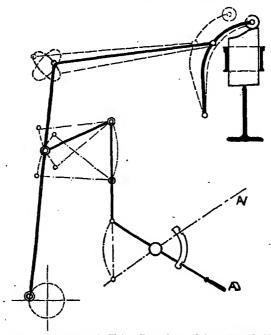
Diagram of Reversible Valve Gear derived from Marshall's Valve Gear.
